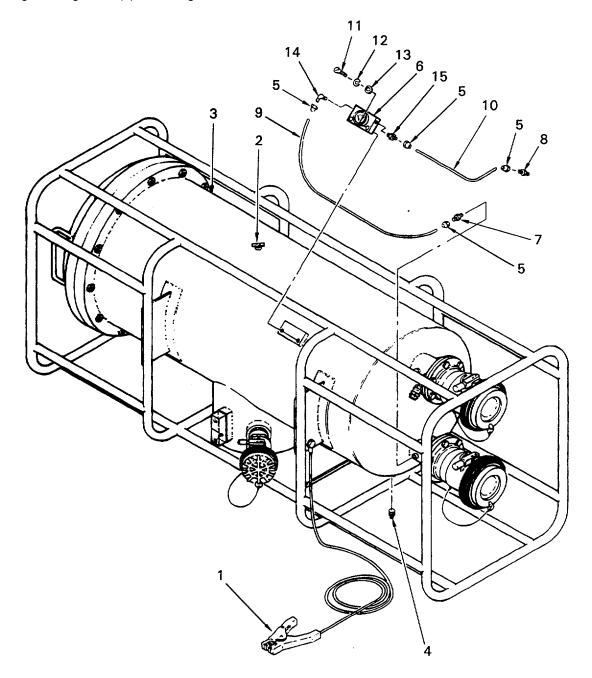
Pressure Gauge and Inlet/Outlet Line Removal
